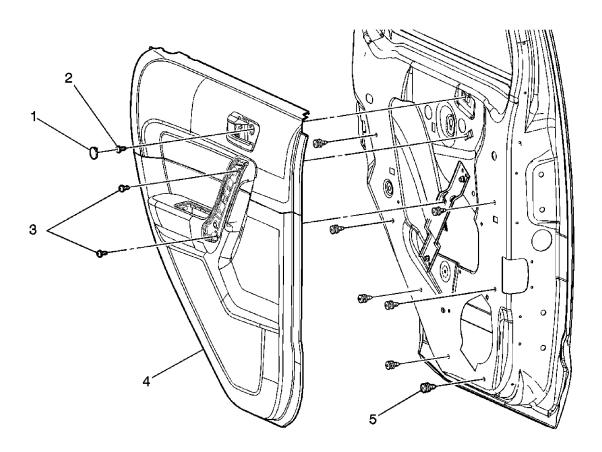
Trim Panel Replacement - Side Rear Door Courtesy of GENERAL MOTORS CORP.
